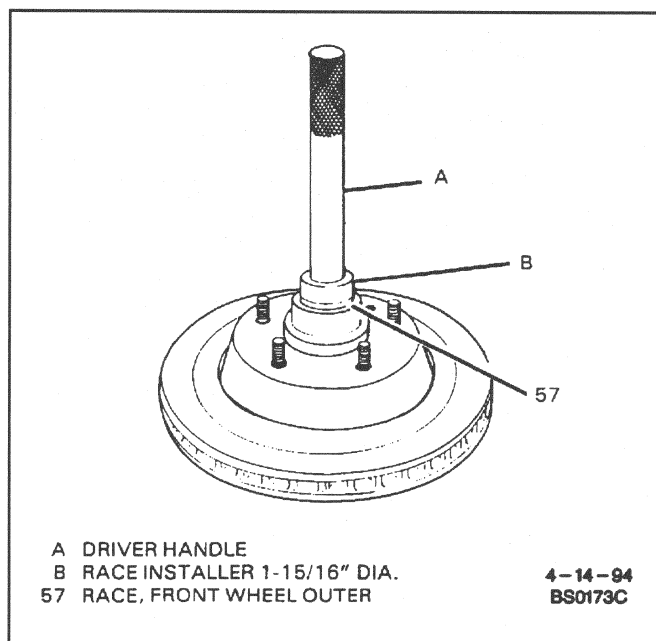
Installing Front Wheel Outer Bearing Outer Race
